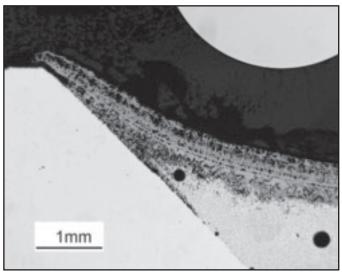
Simulated transformer brazed joint fabricated by torch brazing electronic-grade C11000 copper plate and Cu-6Ag-6.1P braze alloy after exposure to water at 60°C containing 160 ppm sulfide for three weeks. Joint damage, including penetration into the braze and interfacial attack, mirror that from damaged plant transformers.
